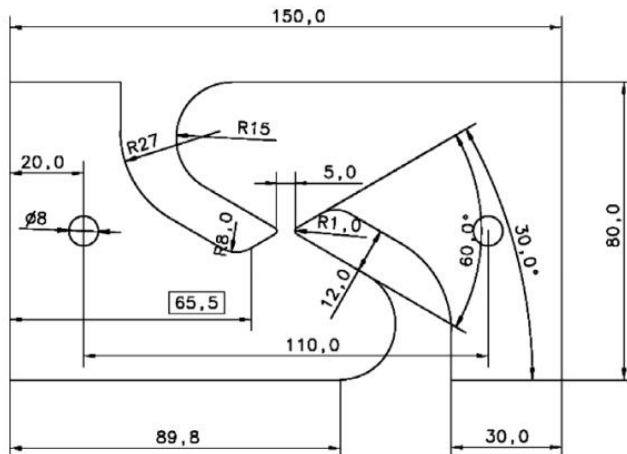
Dimensions of the shear test specimen [Reyes, 2009]
